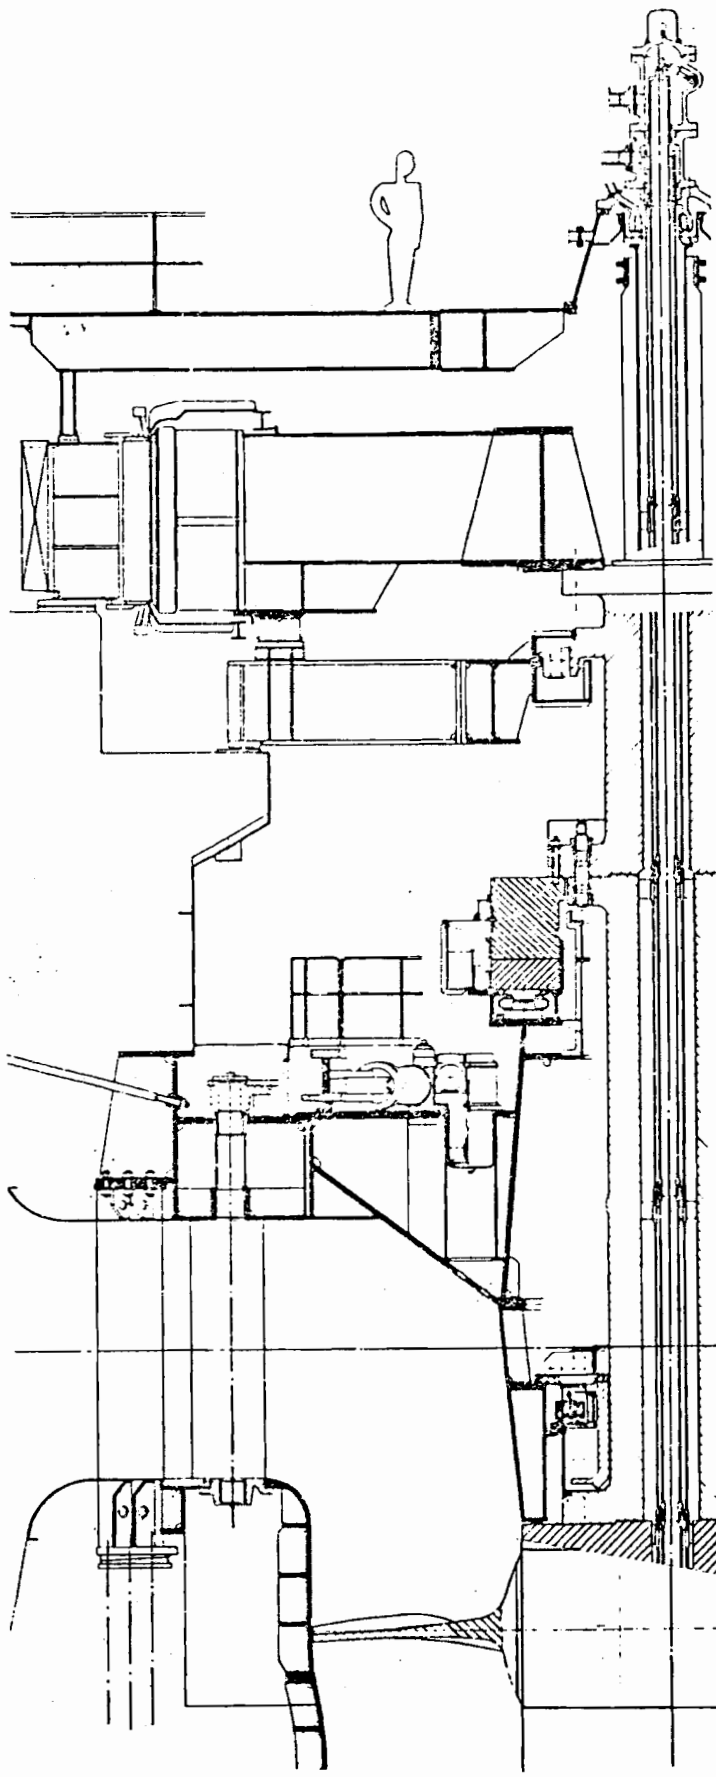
Elevation of KT Palmar, Brazil (owner: Mendes Junior) (Design Neyrpic). $H = 32$ m; $n = 88.2$ rpm; $P = 113.4$ MW. Most powerful Western KT. Simplified welded design. Thrust bearing close to the head cover; lower guide bearing close to the runner; single servomotors for gates. (Drawing courtesy Neyrpic, Grenoble, France)
